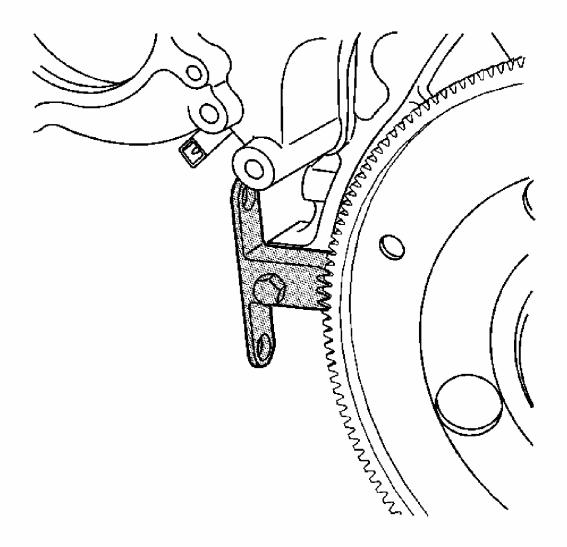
Locating J 44214 Flywheel Holder Courtesy of GENERAL MOTORS CORP.
